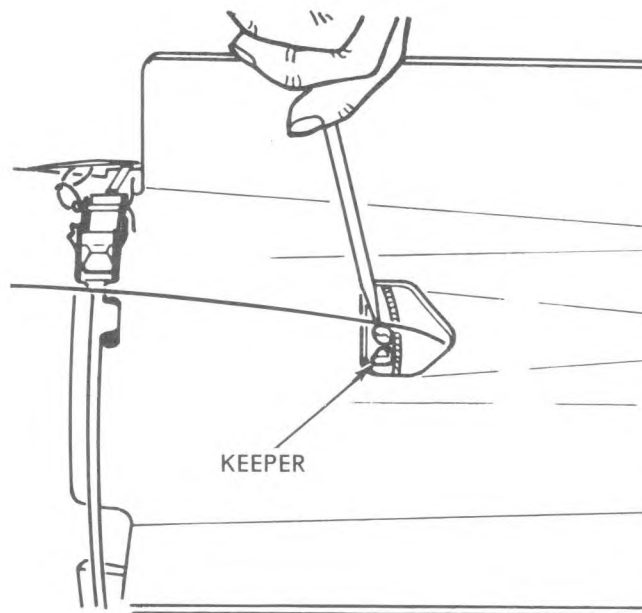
Retaining Ring Ears Feed with Screwdriver
